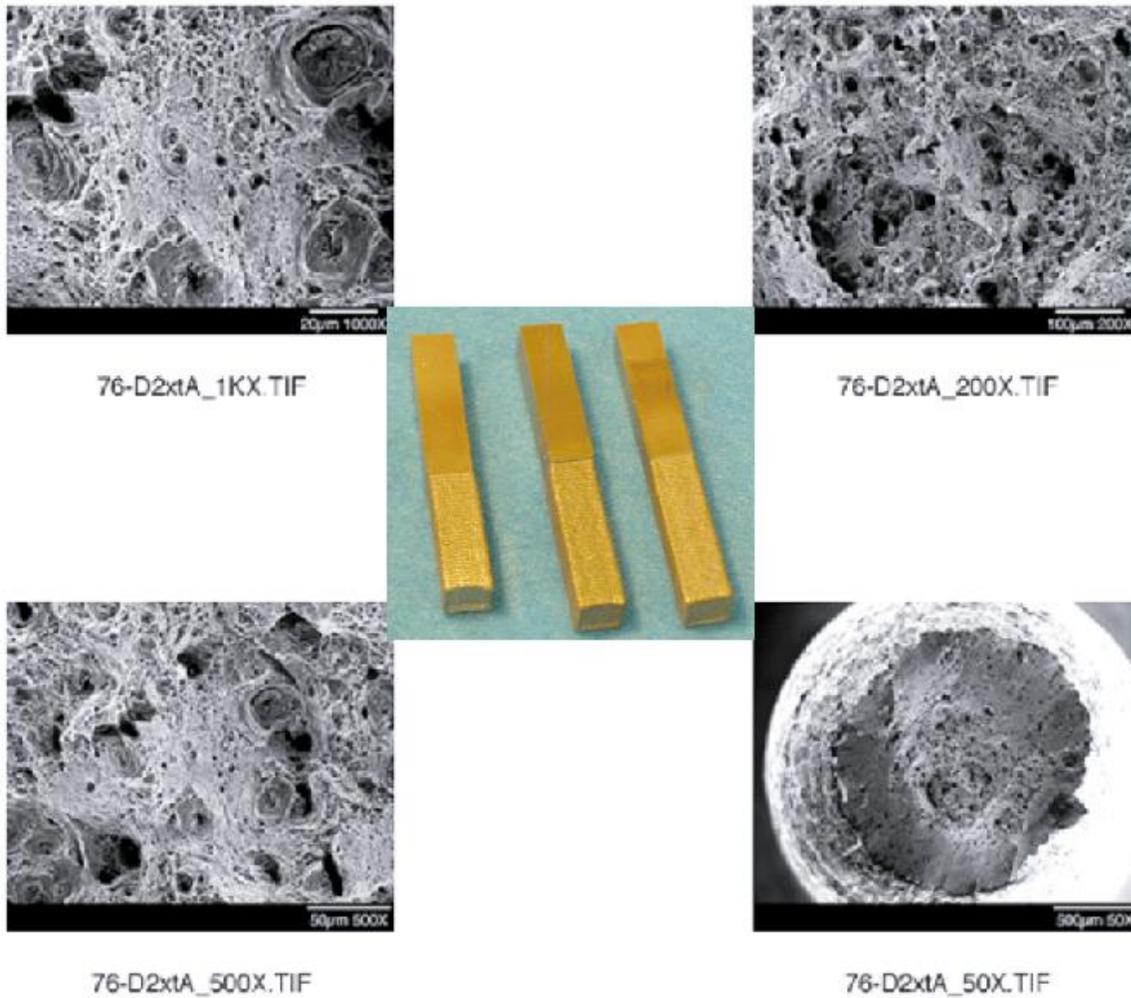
Fracture Surface of Block/Tower Deposit Type D.
